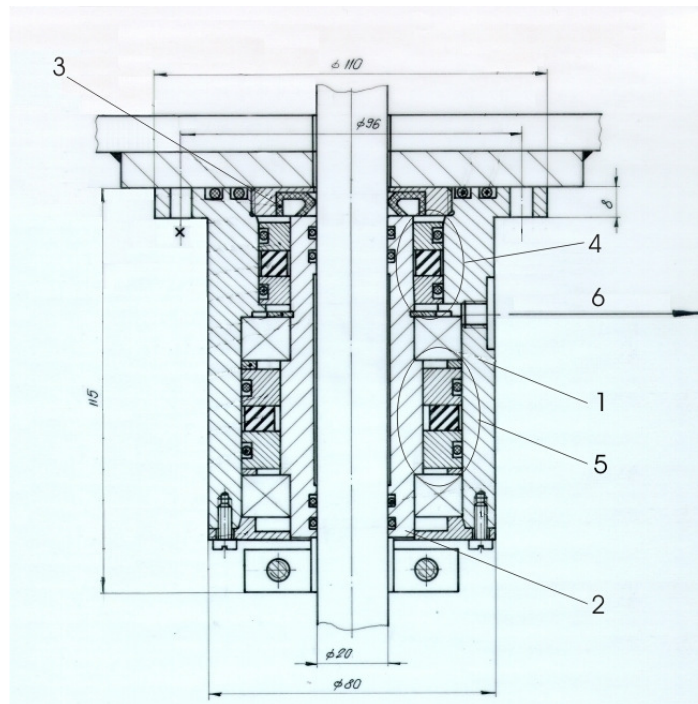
Magnetic fluid – mechanical seal for high vacuum deposition system: 1- non-magnetic shaft; 2- magnetically soft sleeve; 3-friction seal; 4- primary magnetic fluid seal; 5- secondary magnetic fluid seal; 6- to preliminary vacuum pump.
